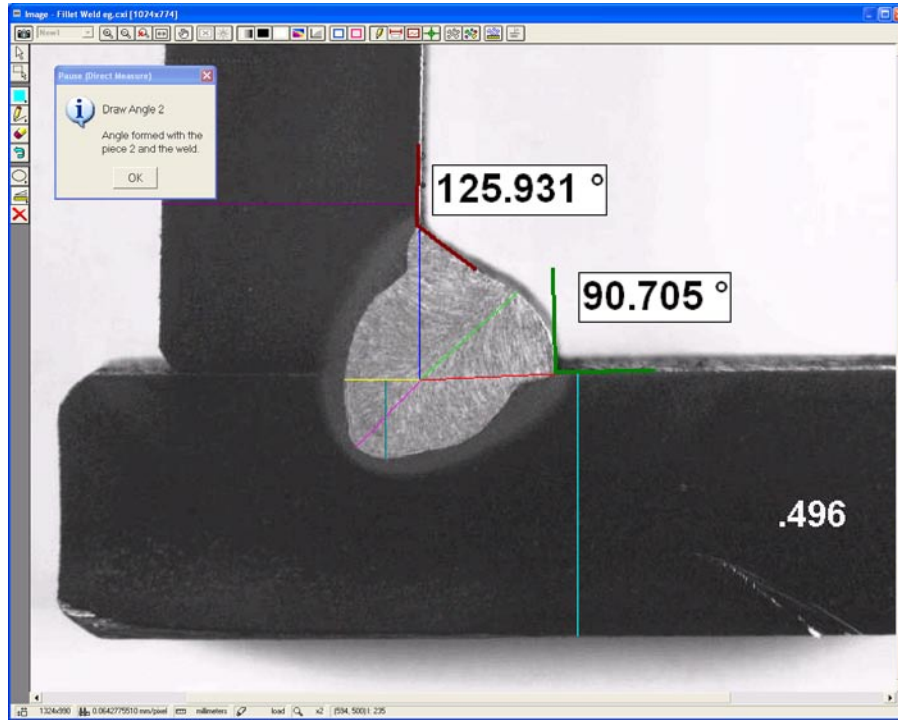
The user is also prompted to draw the angles formed between the beams and the welding.
